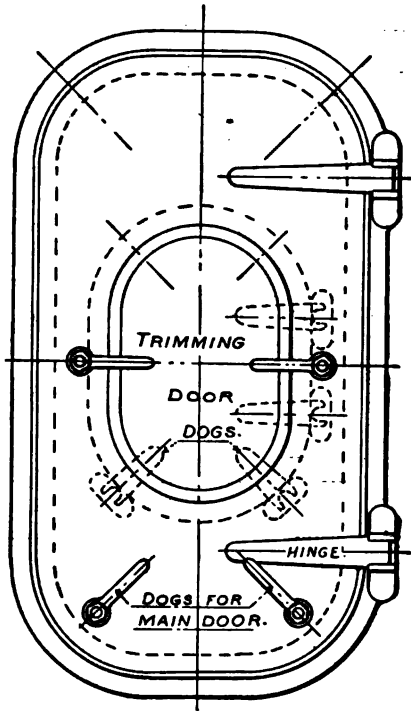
COAL BUNKER TRIMMING DOOR.
